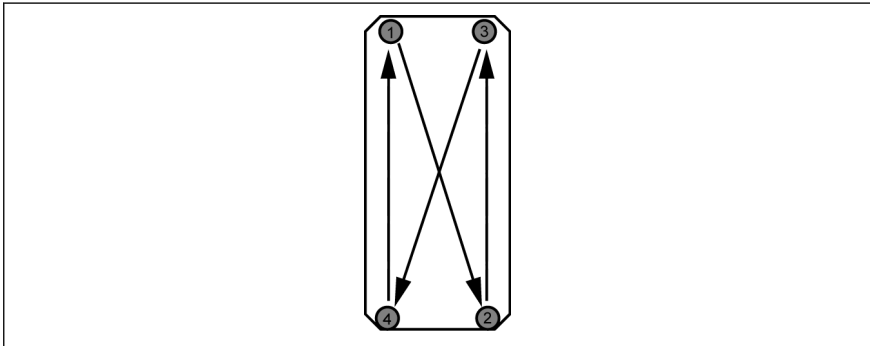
Tightening sequence to mount the module to the heatsink
